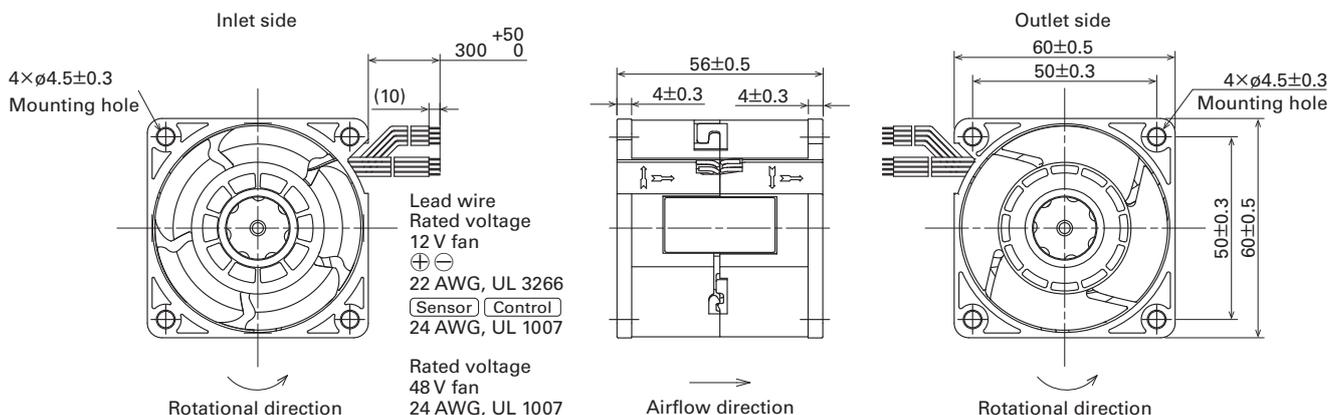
Dimensions of 60 × 60 × 56 mm *San Ace 60 9CRH* type (Unit: mm)
